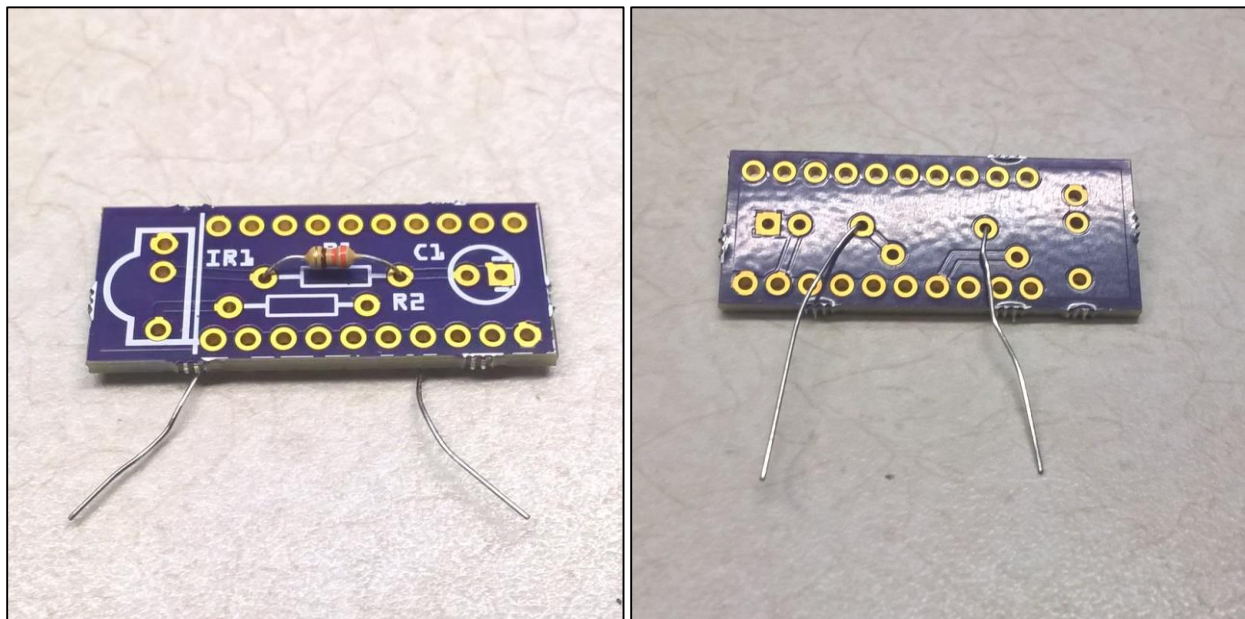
330 Ohm Resistor fixed to PCB, Top and Bottom Views
